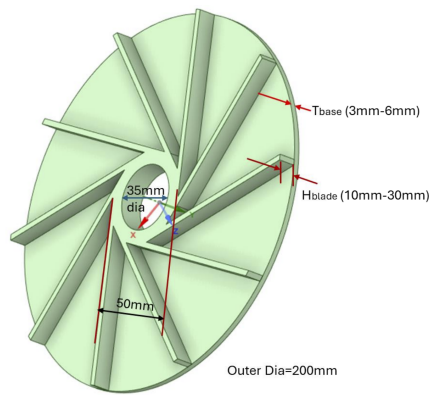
A simplified 10-blade impeller geometry with the key dimensions labeled.
